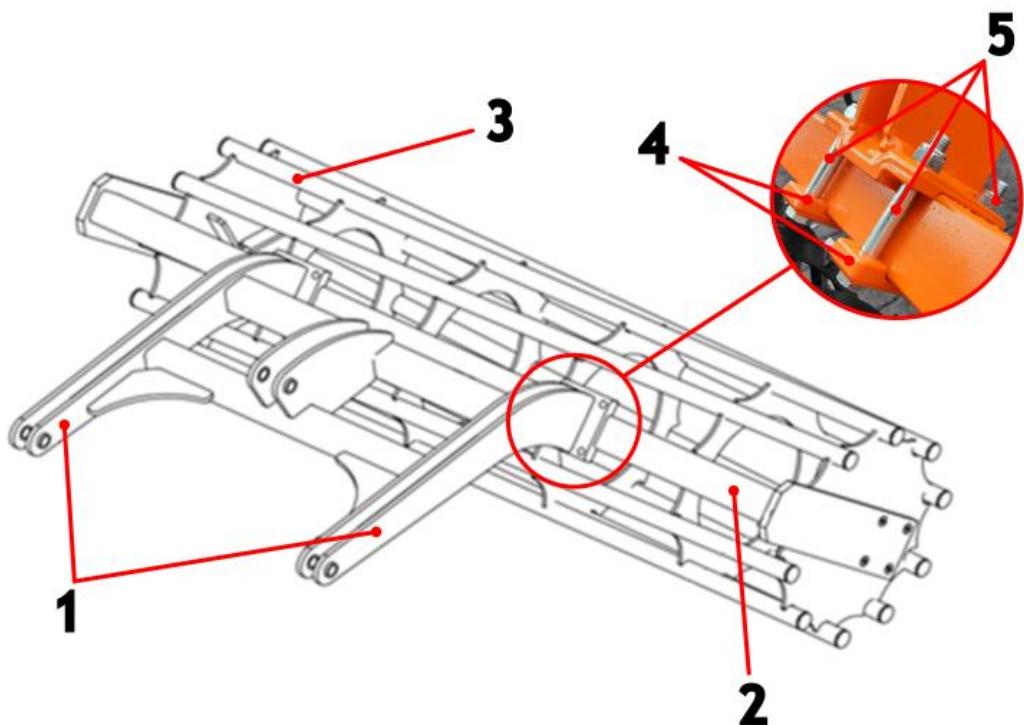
Construction and connection of the arms to a tube-roller (1 - arms, 2 - tube-roller bracket, 3 - tube-roller, 4 - mounting plates, 5 - mounting screws)
